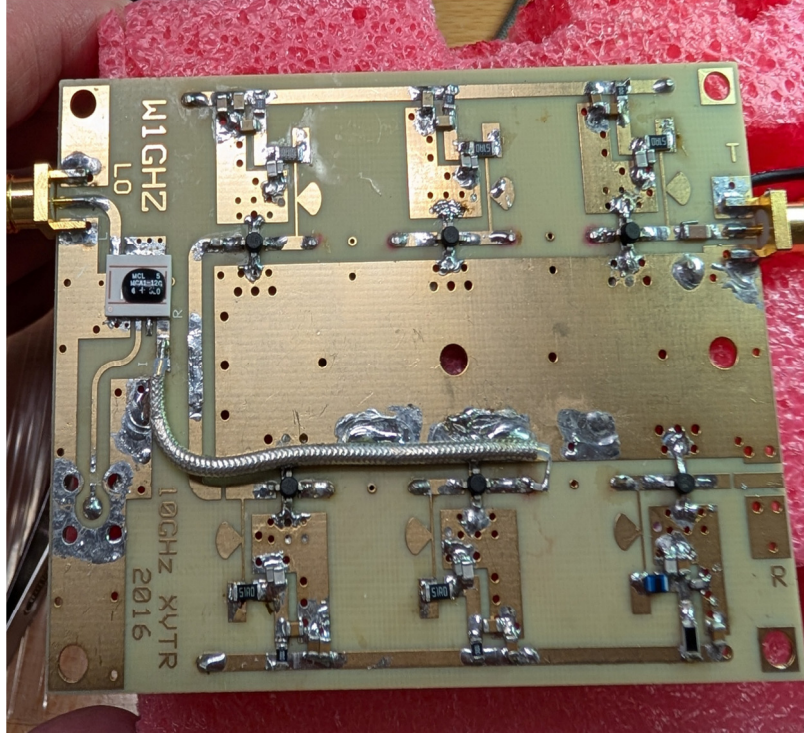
Prototype beacon PCB from hacked 10 GHz Transverter board
